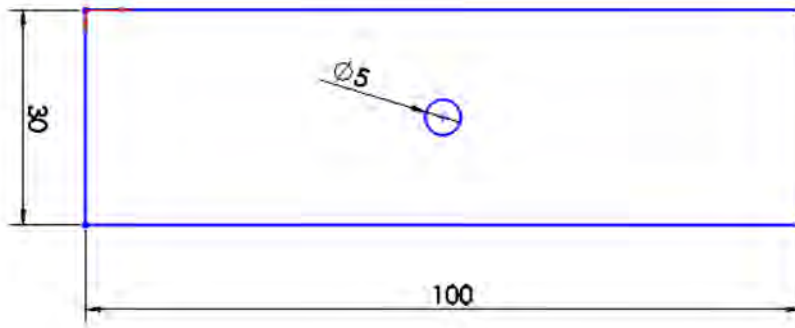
Dimension compression test perforated specimens. All dimensions in millimeters.
